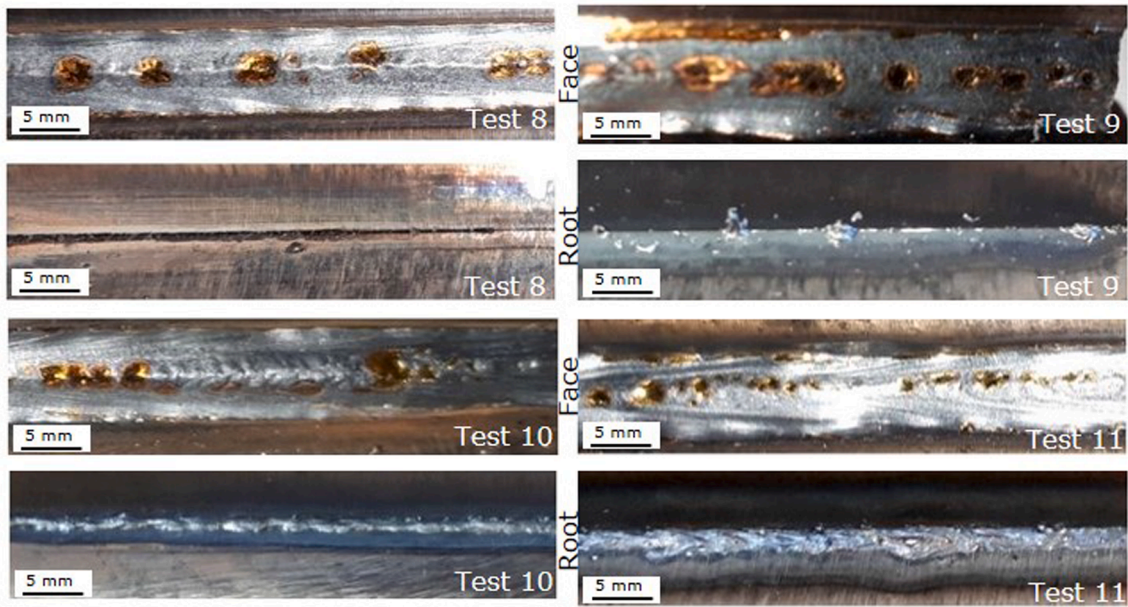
Details of the appearance of front face and root face of weld beads in T-joints.
